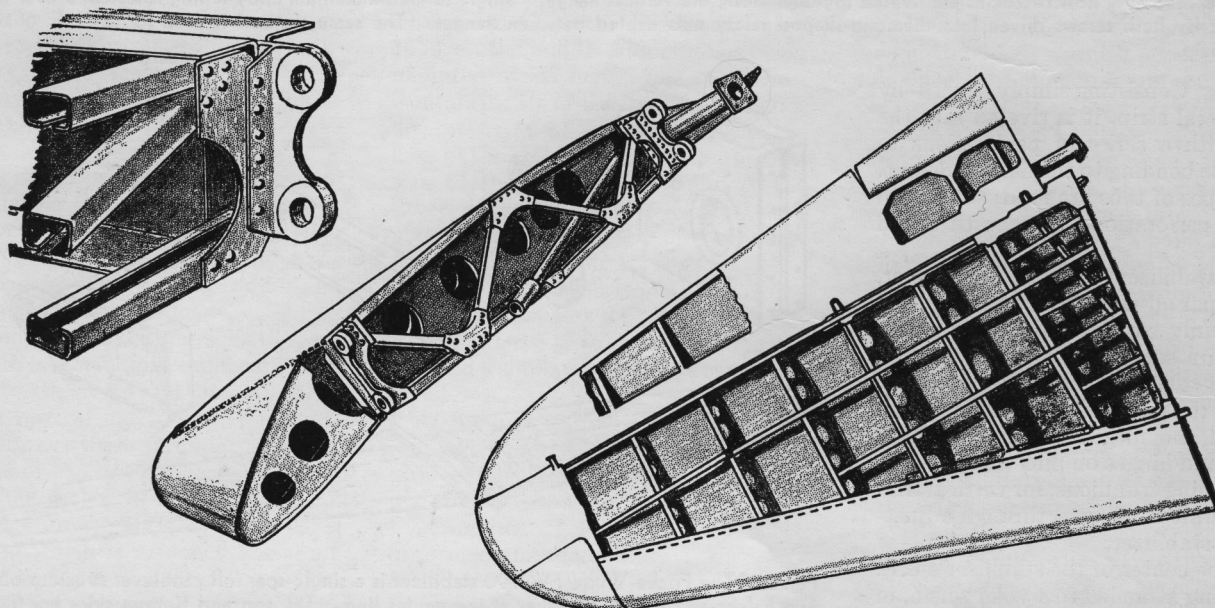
Stabilizer inboard rib and fuselage attaching fittings are shown in the detail sketch (top left), with a profile view (center) showing how the L.E. of the stabilizer is attached top and bottom by piano hinges. The elevator torque tube is shown just aft of the rear spar. The plan view (right) with a portion of the skin removed, shows the rib and stringer construction. Stabilizer T.E. skin is crimped to form hoods over the elevator L.E., as is done on the vertical fin.
